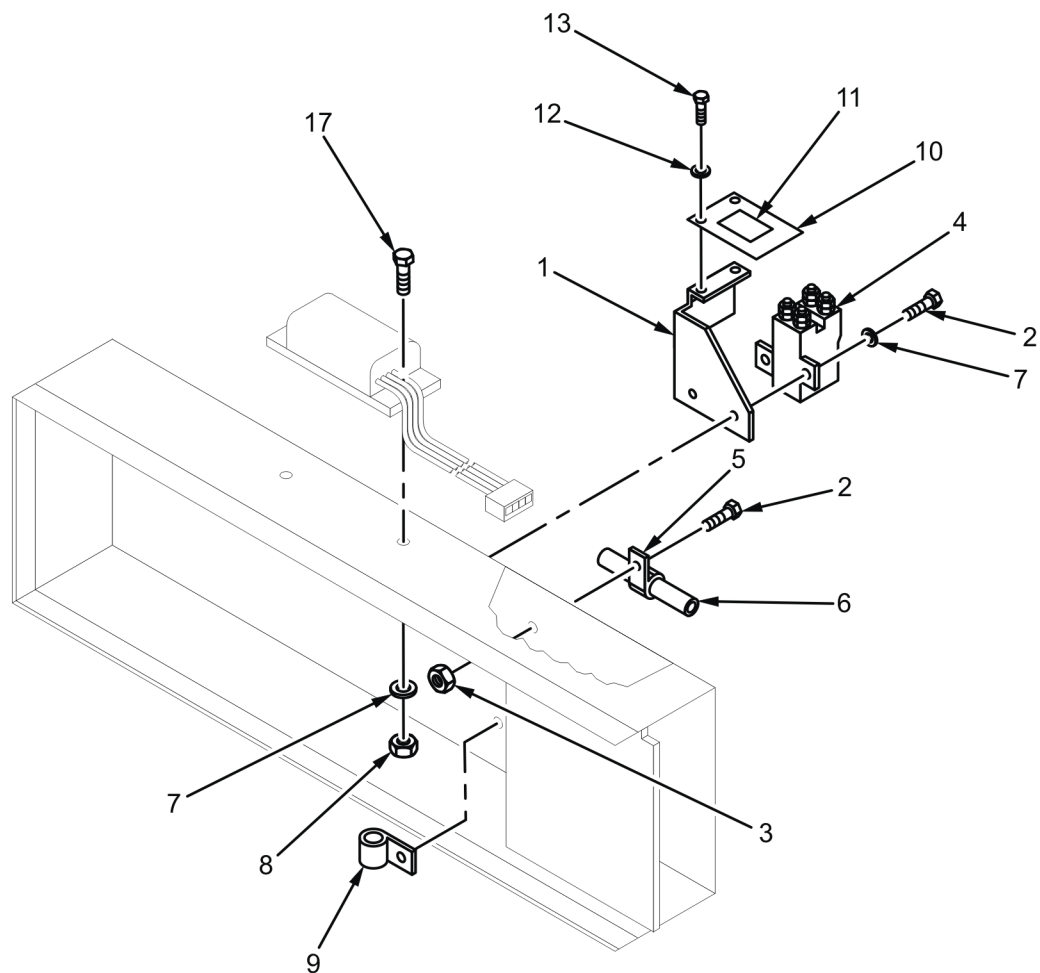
CONTACTOR ASSEMBLY (Sheet 1 of 2).
